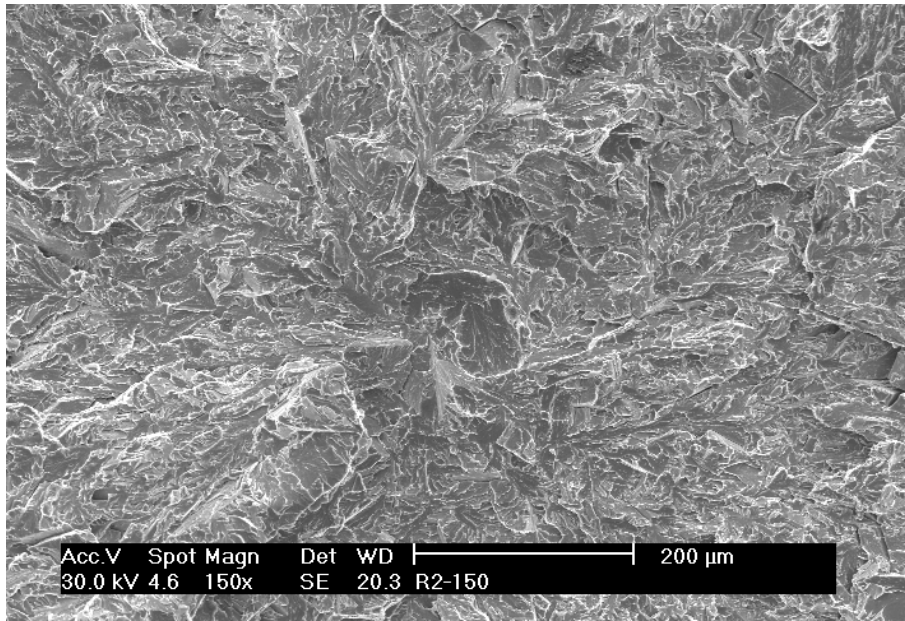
Fracture surface for 2mm notched specimen tested at  $-150^{\circ}\text{C}$ .
